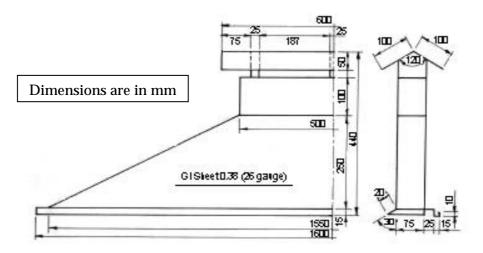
Improved solar cabinet dryer chimney dimensional details
